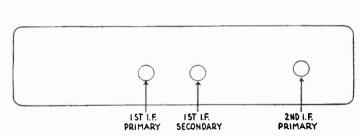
Rear of Model 32 Chassis, showing location of I.F. Compensating Condensers. I.F. of Model 32 is 260 K. C.
